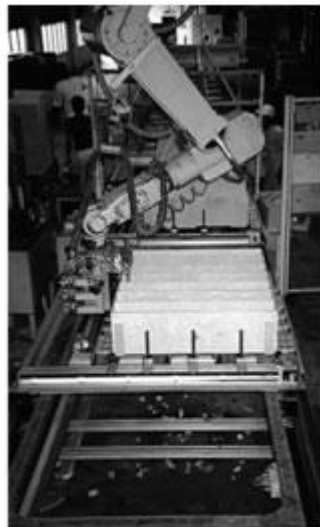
View of side plate stapling robot in insulation box manufacturing factory
